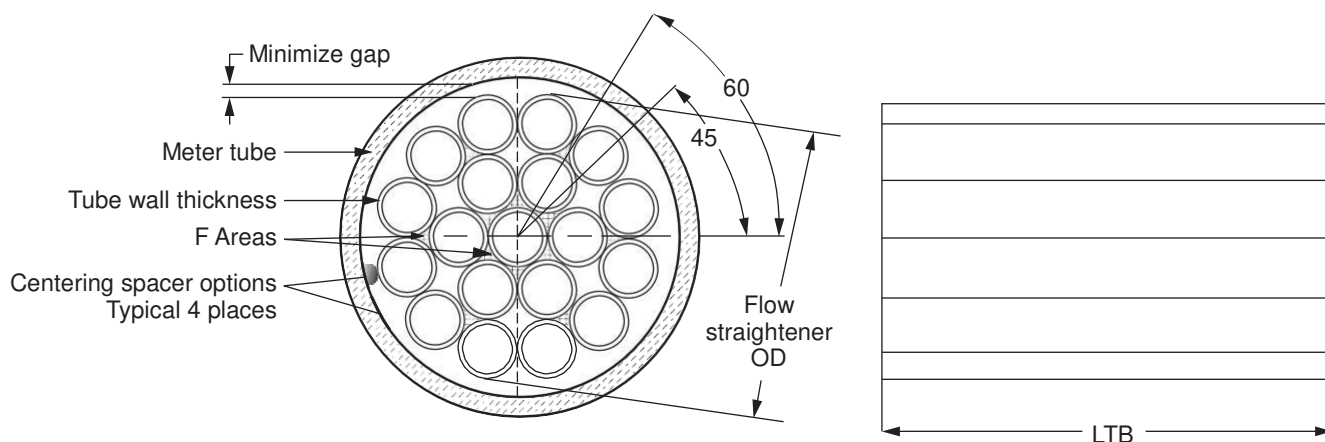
1998 Uniform Concentric 19-Tube Bundle Flow Straightener
